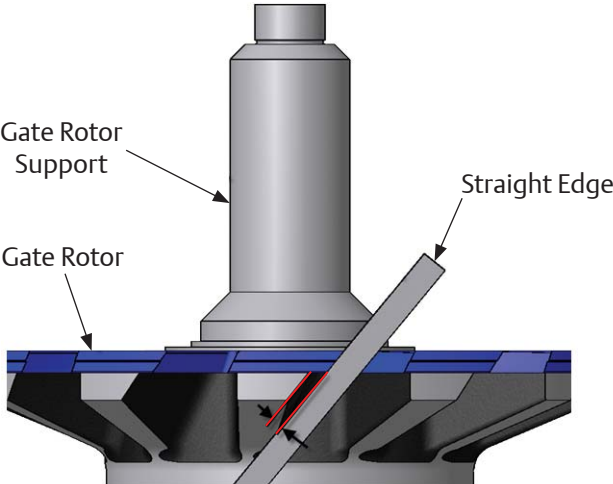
Gate Rotor and Support Clearance - Measuring
